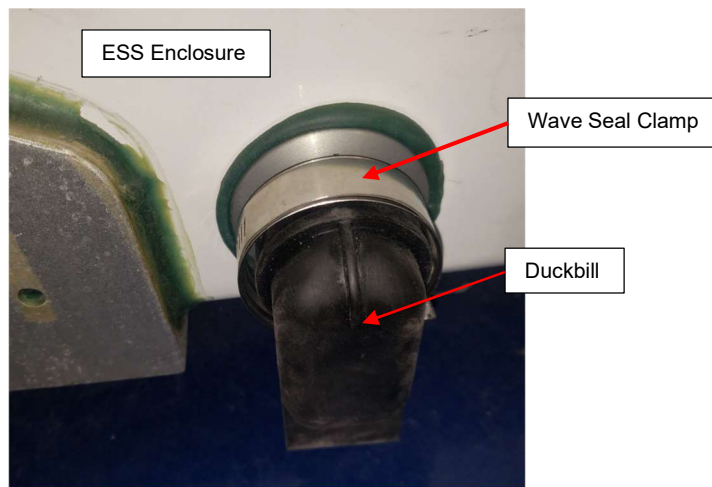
Duckbill Installation (Prior to Torquing Wave Seal Clamp)
